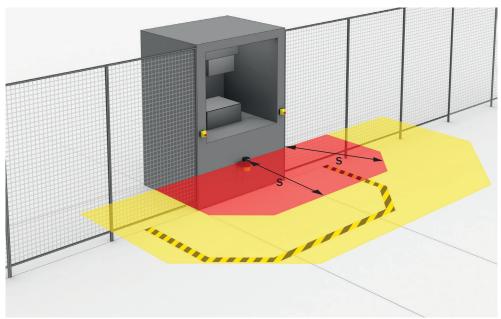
Stationary application with horizontal scan plane for hazardous area protection
